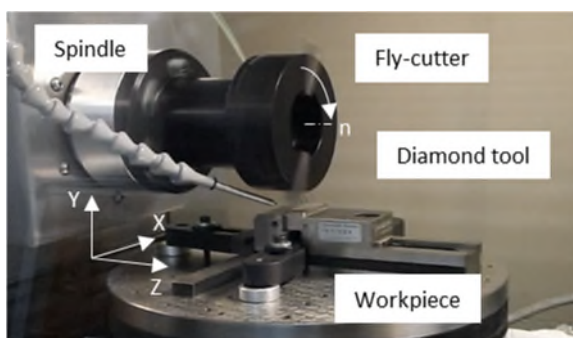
Surface machining of a workpiece with a diamond tool mounted in a fly-cutter on the main spindle
